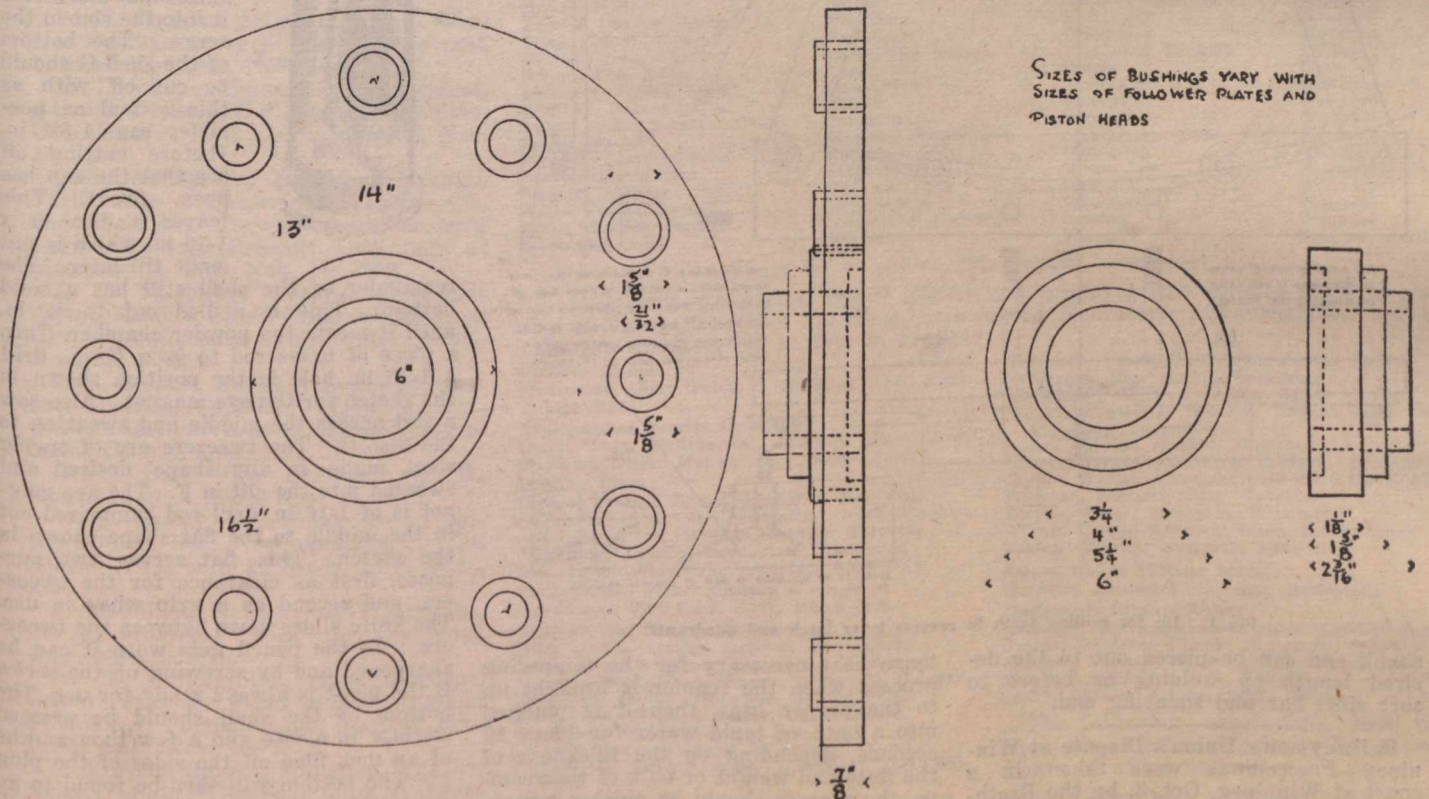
Jig for drilling holes in follower plates and piston heads.
